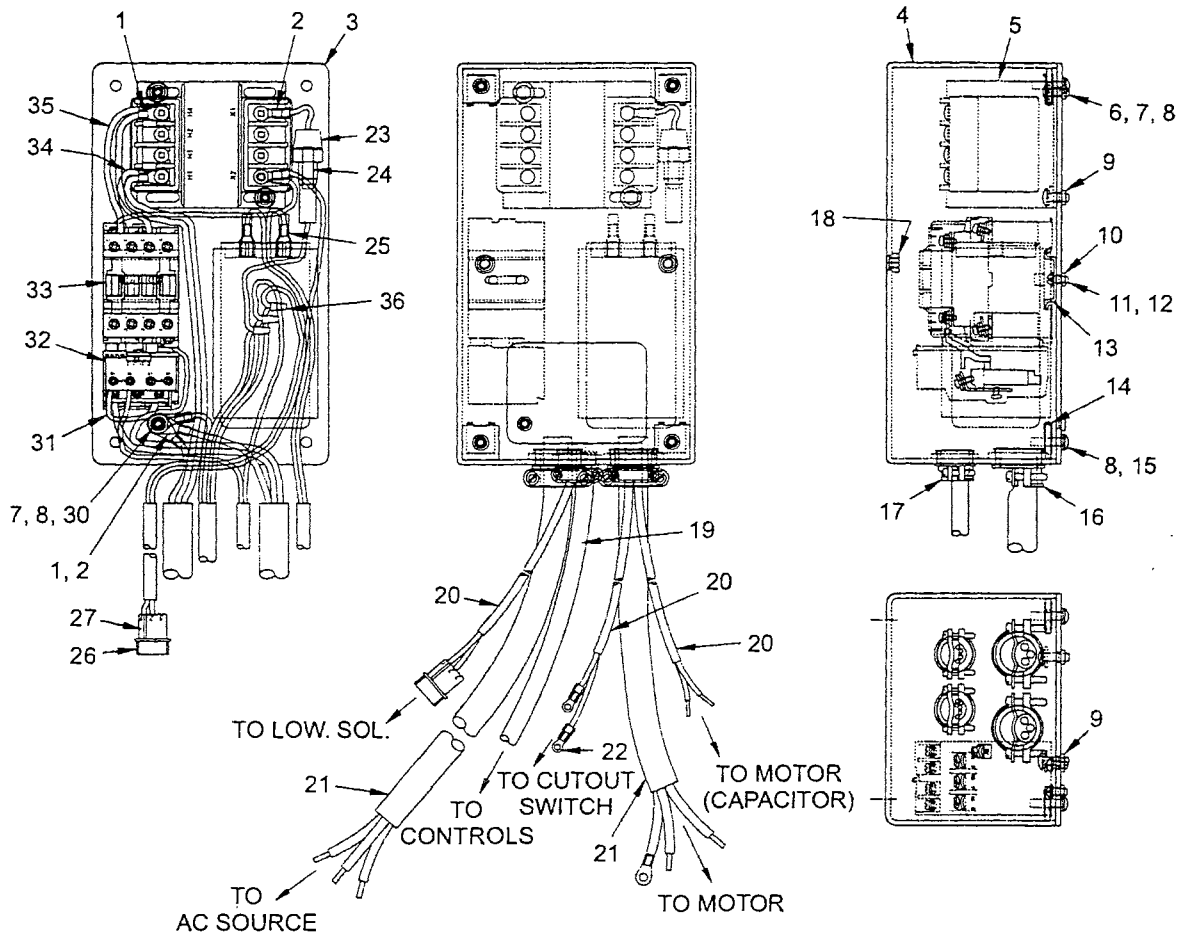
Electrical Box Assembly (36/48/60" Tables)
